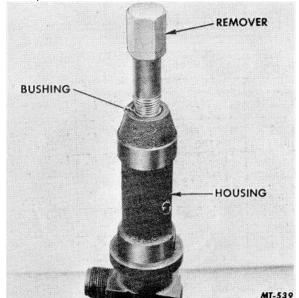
Installing Remover SE-1955-5 In Lower Bushing
